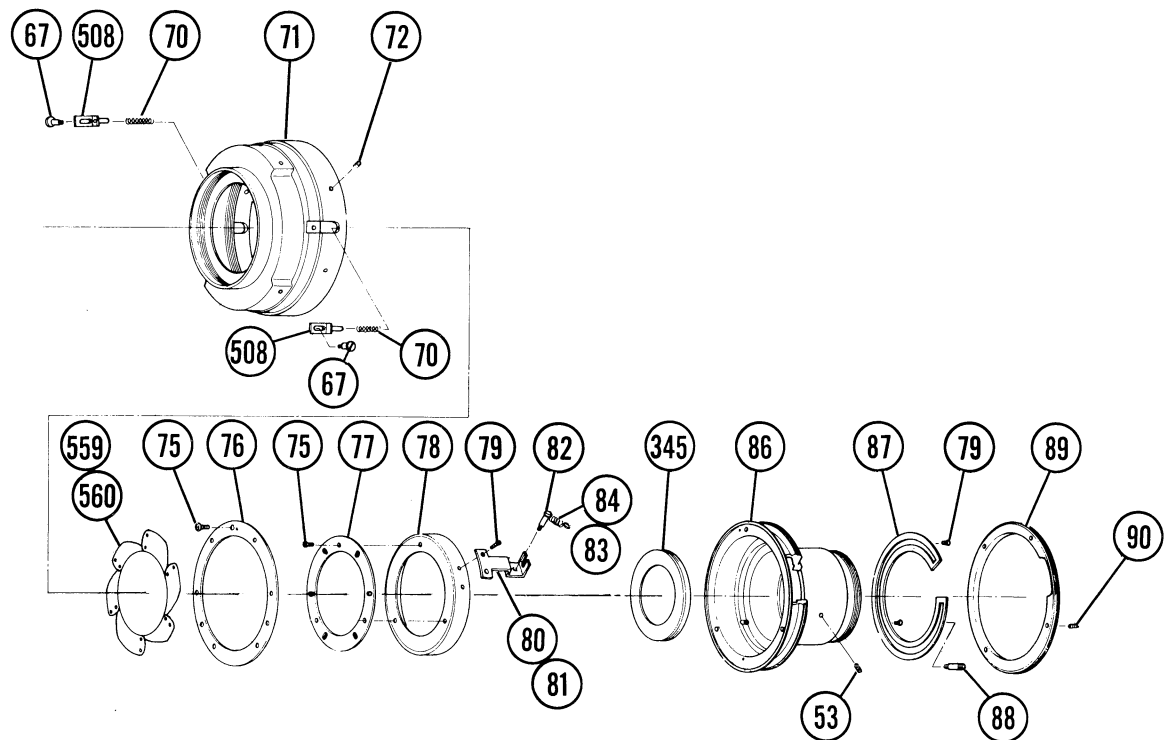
Diaphragm Housing Assembly, All Mounts (Ref. 509-514, Pg 58)
